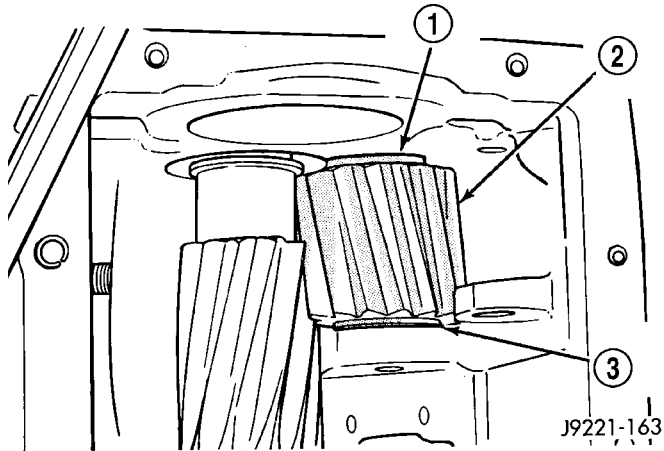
IDLER GEAR FRONT THRUST WASHER
